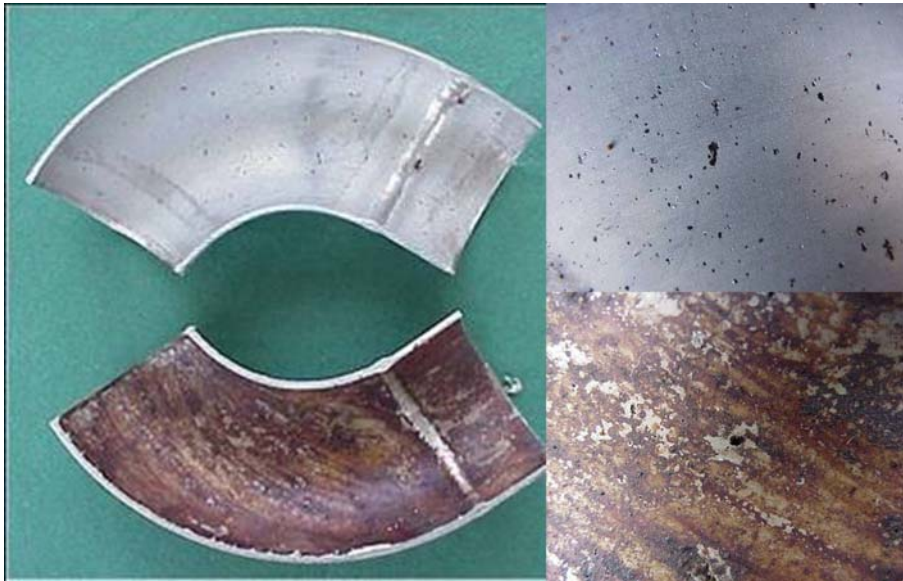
The photos show the cut open piping (after cleaning at the top) between the 2nd stage separator and 2nd stage compressor. Severe pitting corrosion initiated from the gas side was observed.
